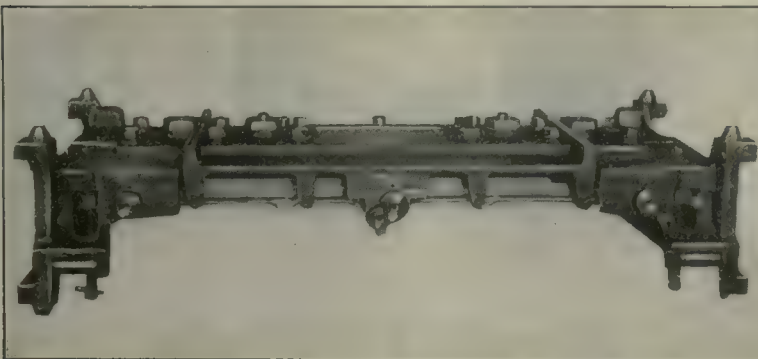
DRILL JIG FOR CARRIAGE FRAME
